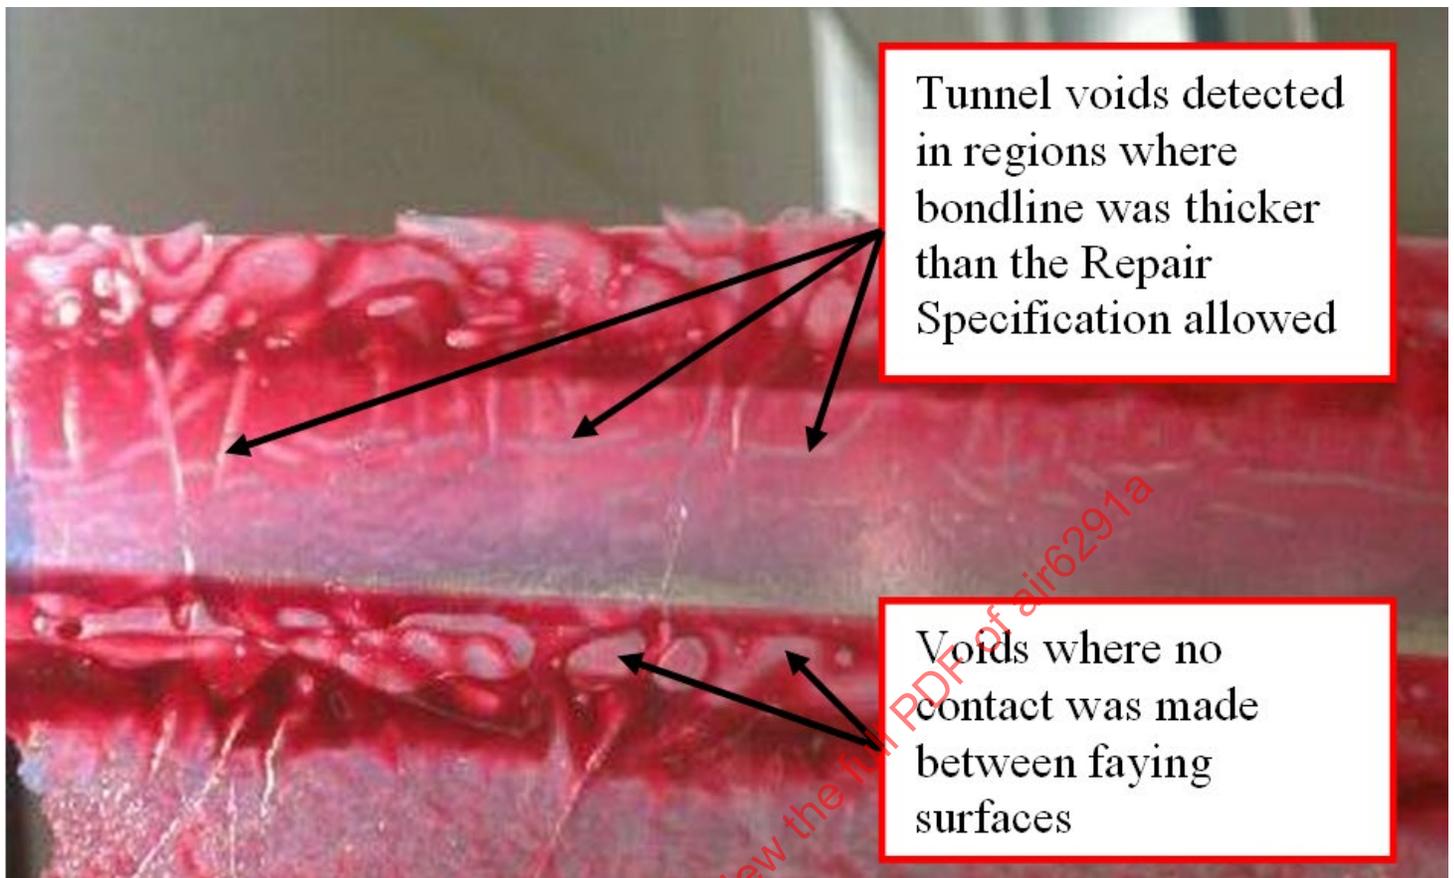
Tunnel voids shown at the interface between a tool side skin and spar flange for a wedge assembly
